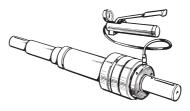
Bearing Assemblies 5F and 6F To achieve satisfactory contact between the three bearings and the spacing rings a hydraulic nut must be used.
